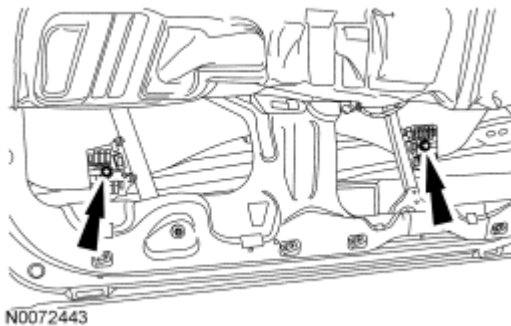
Locating Door Window Glass Bolts & Sleeves
